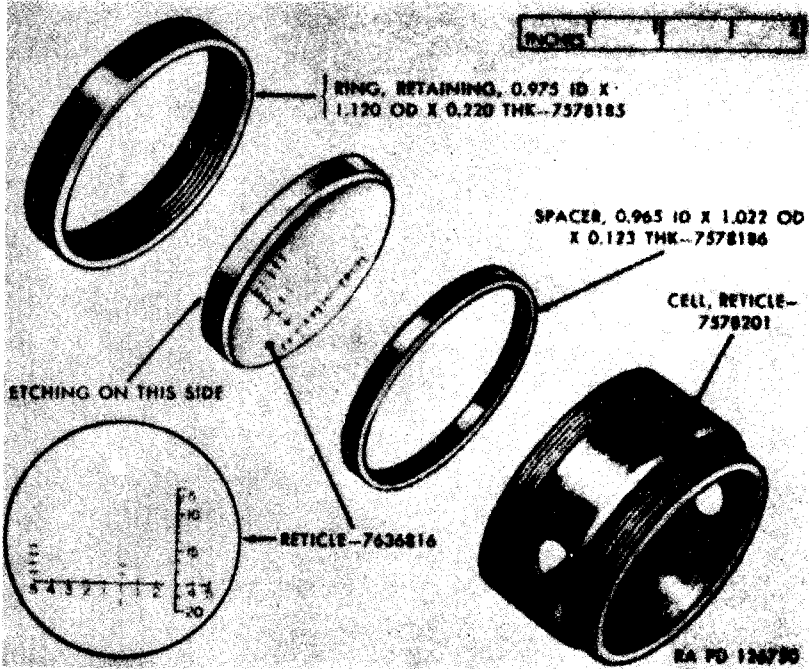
Reticle assembly 7636819 (M16 only) - exploded view.
